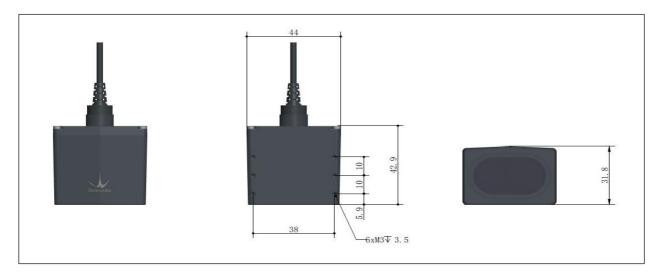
TF03-100 dimensions (Left 1: top view; Left 2: upward view; Left 3: front view) Unit: mm
